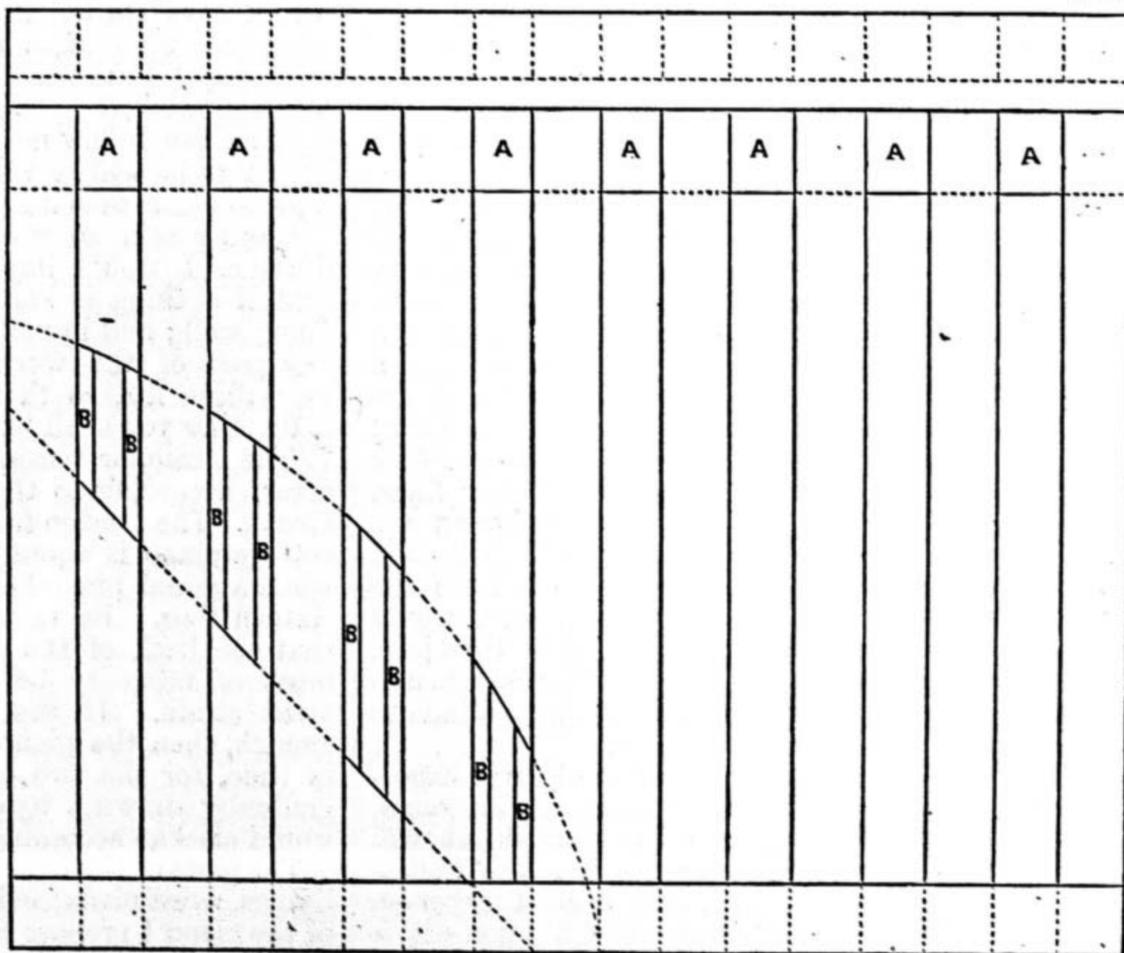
Back View of Back—A, Blocks behind Wrest Plank. B, Blocks behind Bent Sides. (Scale, 1 inch to 1 foot.)
